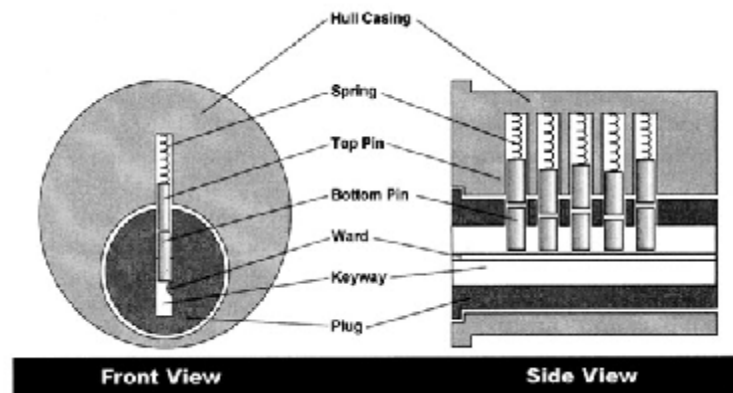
Parts of a Pin Tumbler lock<sup>9</sup>
